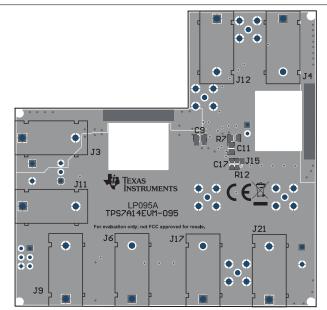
TPS7A14EVM-095 Top Assembly Layer and Silk Screen
